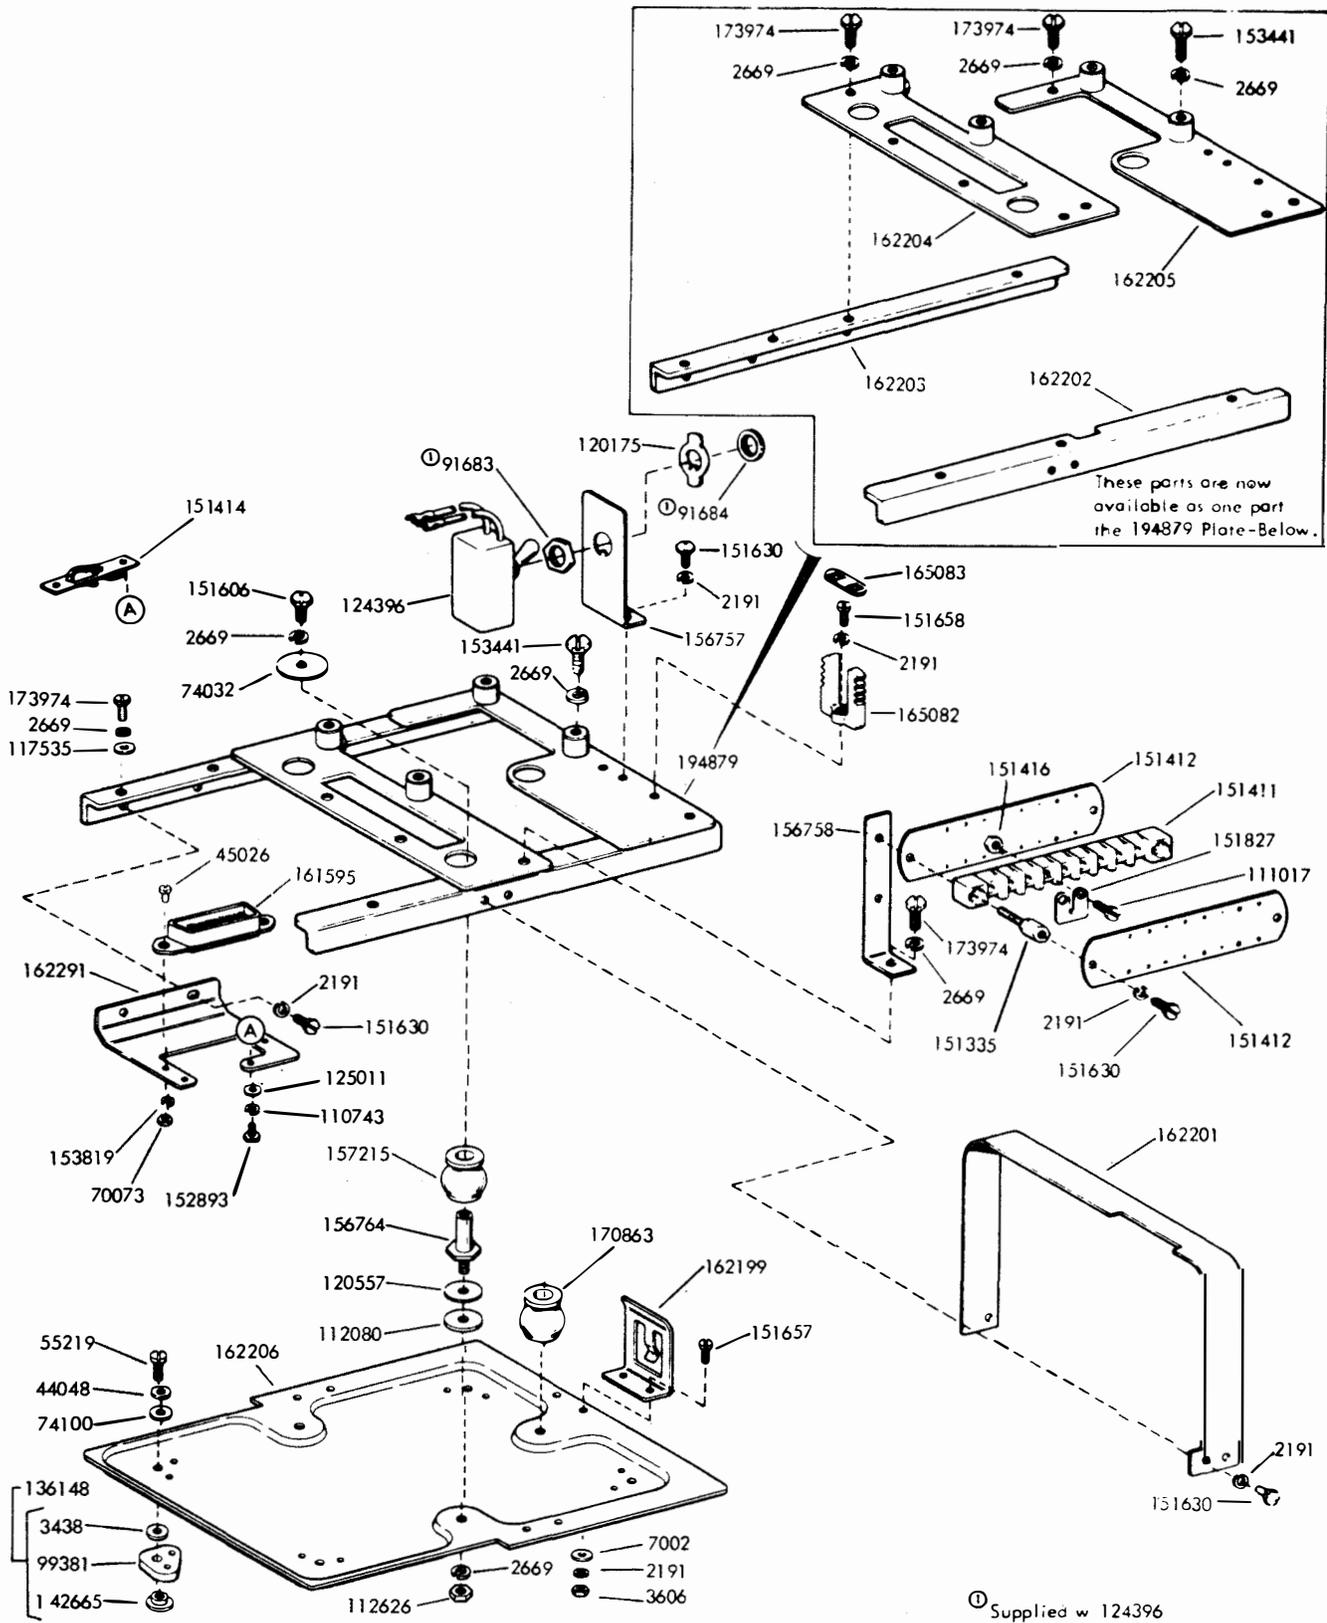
Miniature Base and Electrical Components (Sheet 1 of 2)
